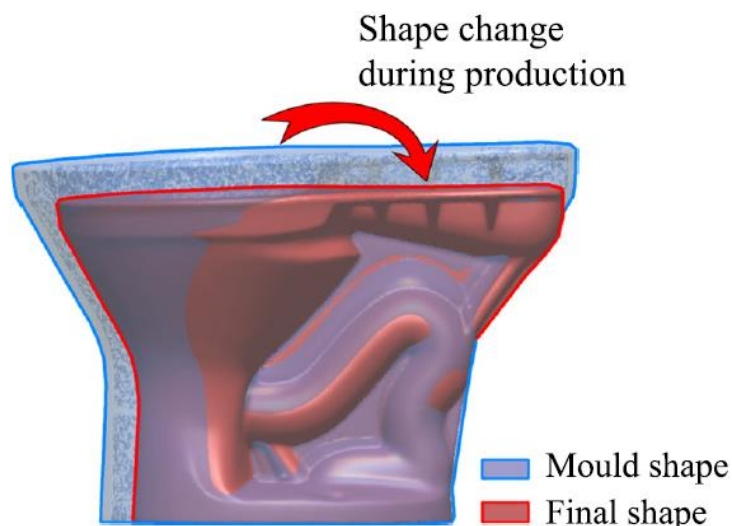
Mould shape vs final workpiece shape (adapted from [21])
